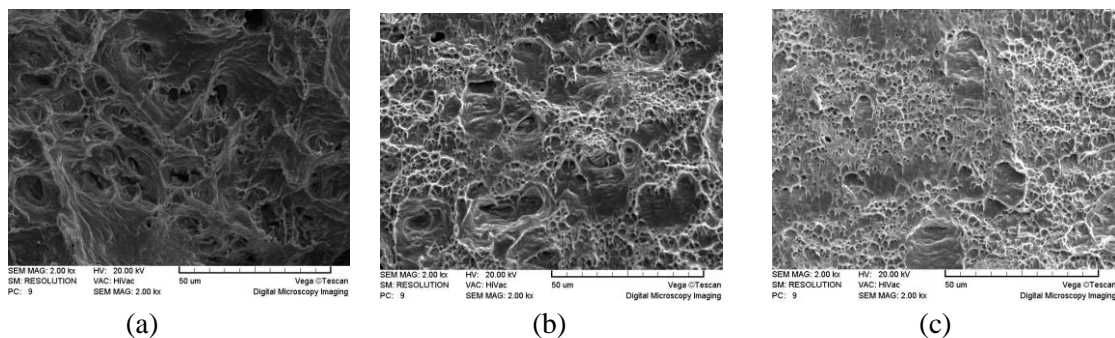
The rupture appearance of the the welding joints: (a) 1000h, (b) 2000h, (c) 3000h
